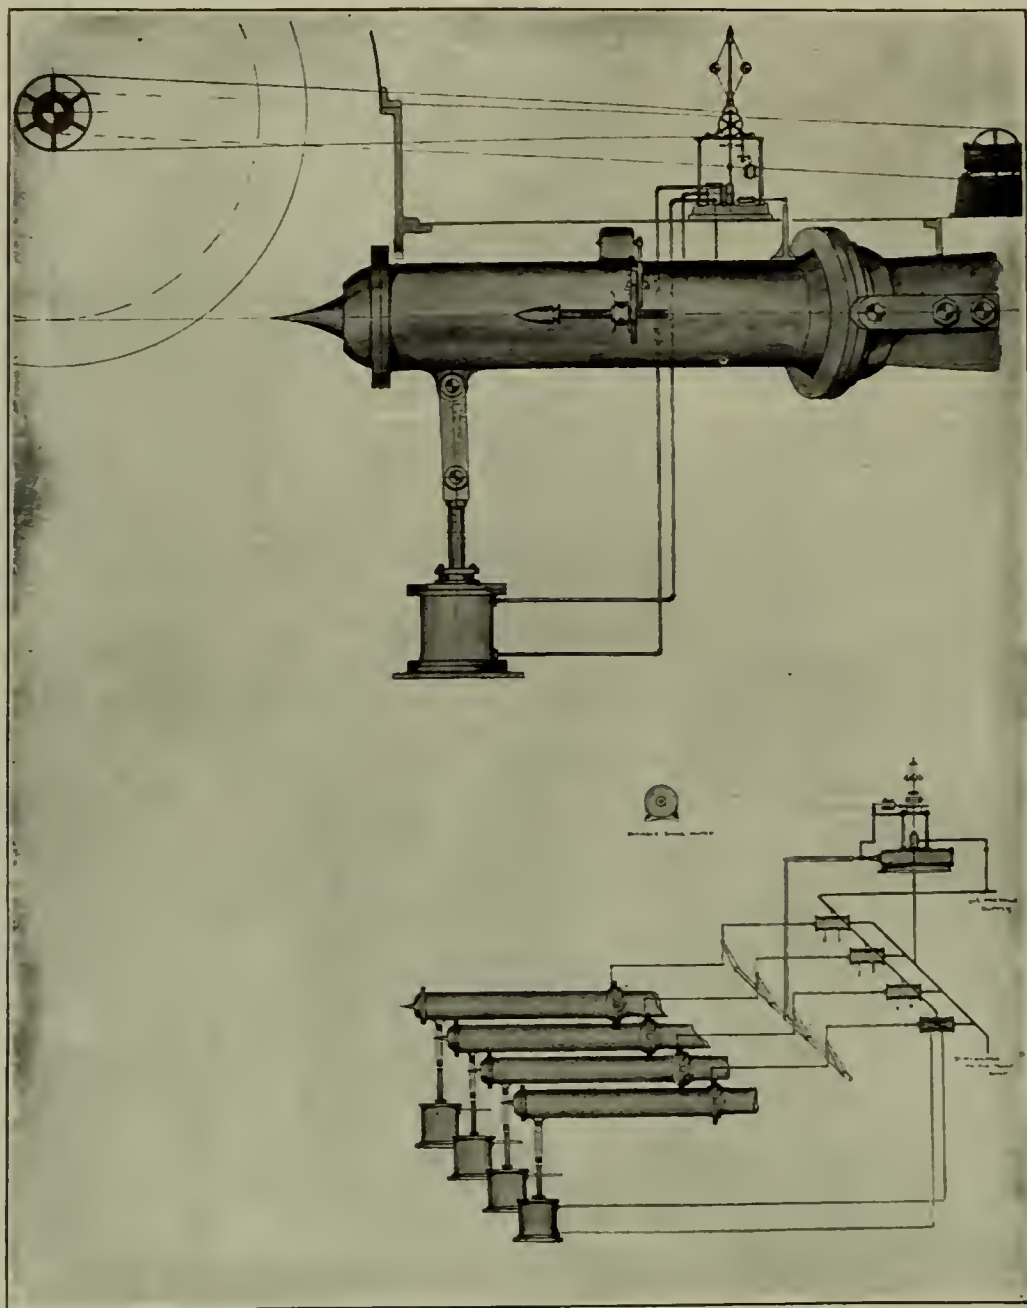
CONSTRUCTION IN WHICH EACH NOZZLE IS CONTROLLED BY A PRESSURE CYLINDER IMMEDIATELY ABOVE OR BELOW IT, AND IN WHICH A SINGLE GOVERNOR IS DRIVEN BY A SYNCHRONOUS MOTOR
